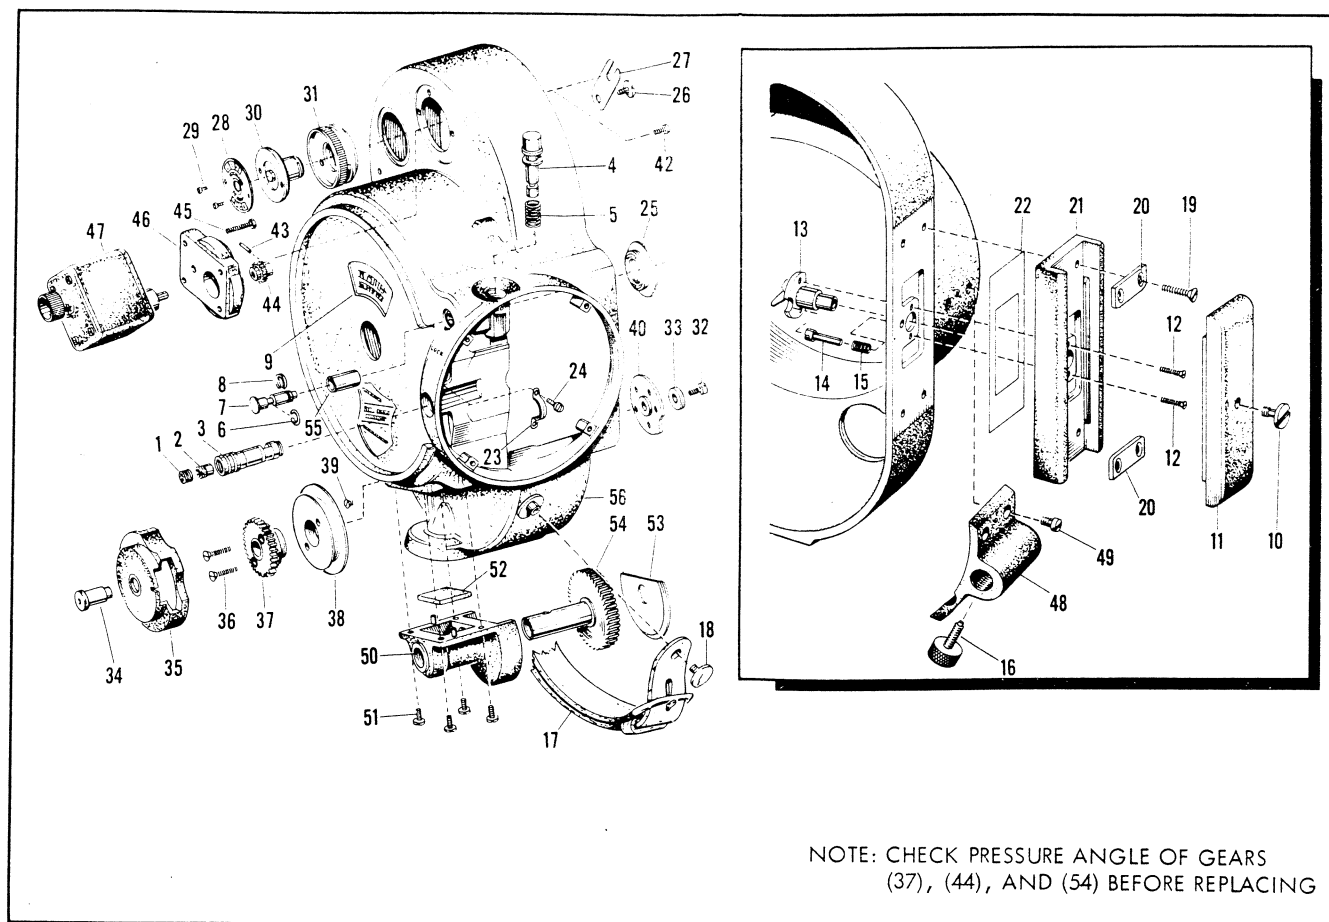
Camera Frame Assembly - Des. 70H and 70HR Camera
